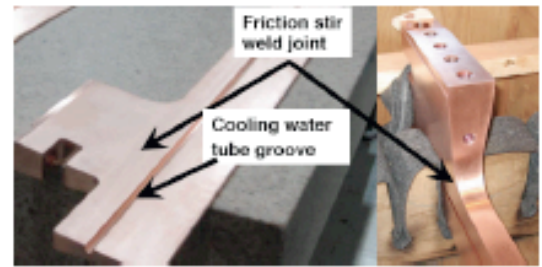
A TF bar with friction stir welded lead extension and cooling tube groove.
